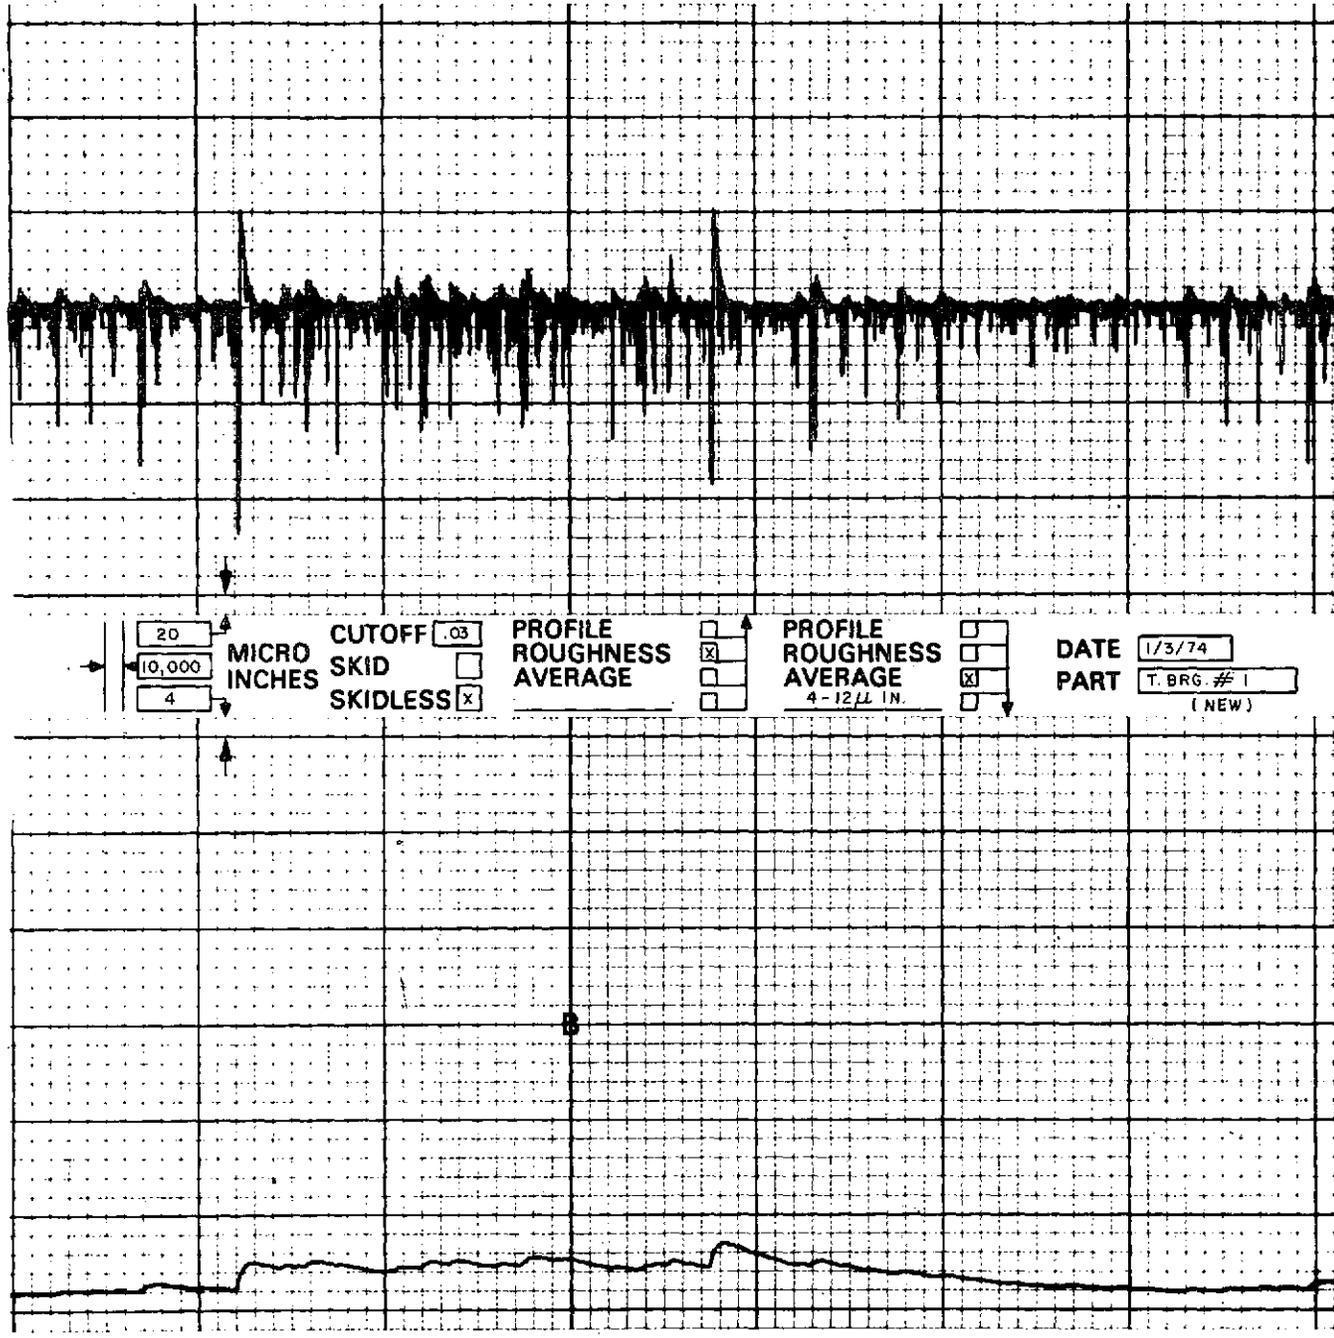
Surface Finish, Thrust Bearing #1 (New) Before MoS₂ Coating
